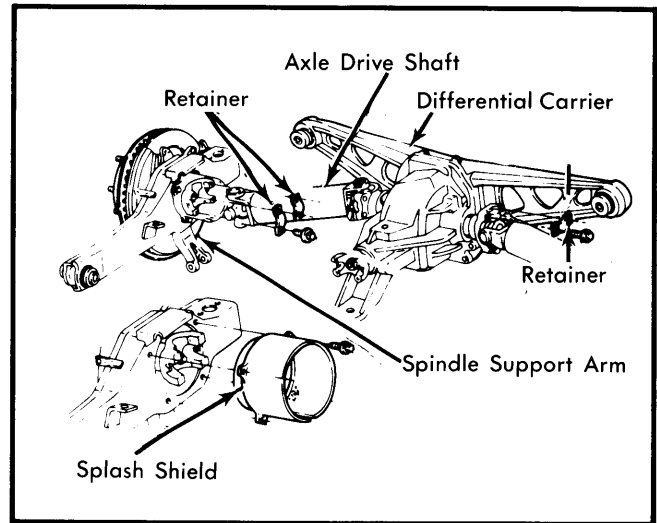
Drive Axle Shaft Removal. Spindle Support Arm Must Be Pushed Outward To Release Shaft.
